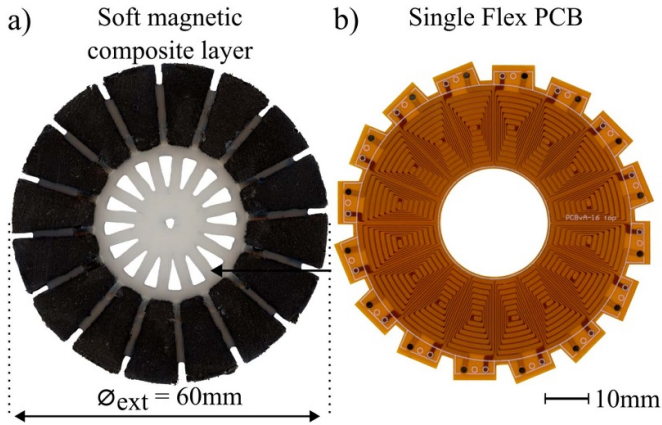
Top view of (a) the soft magnetic composite layer and (b) a single layer flexible PCB.
